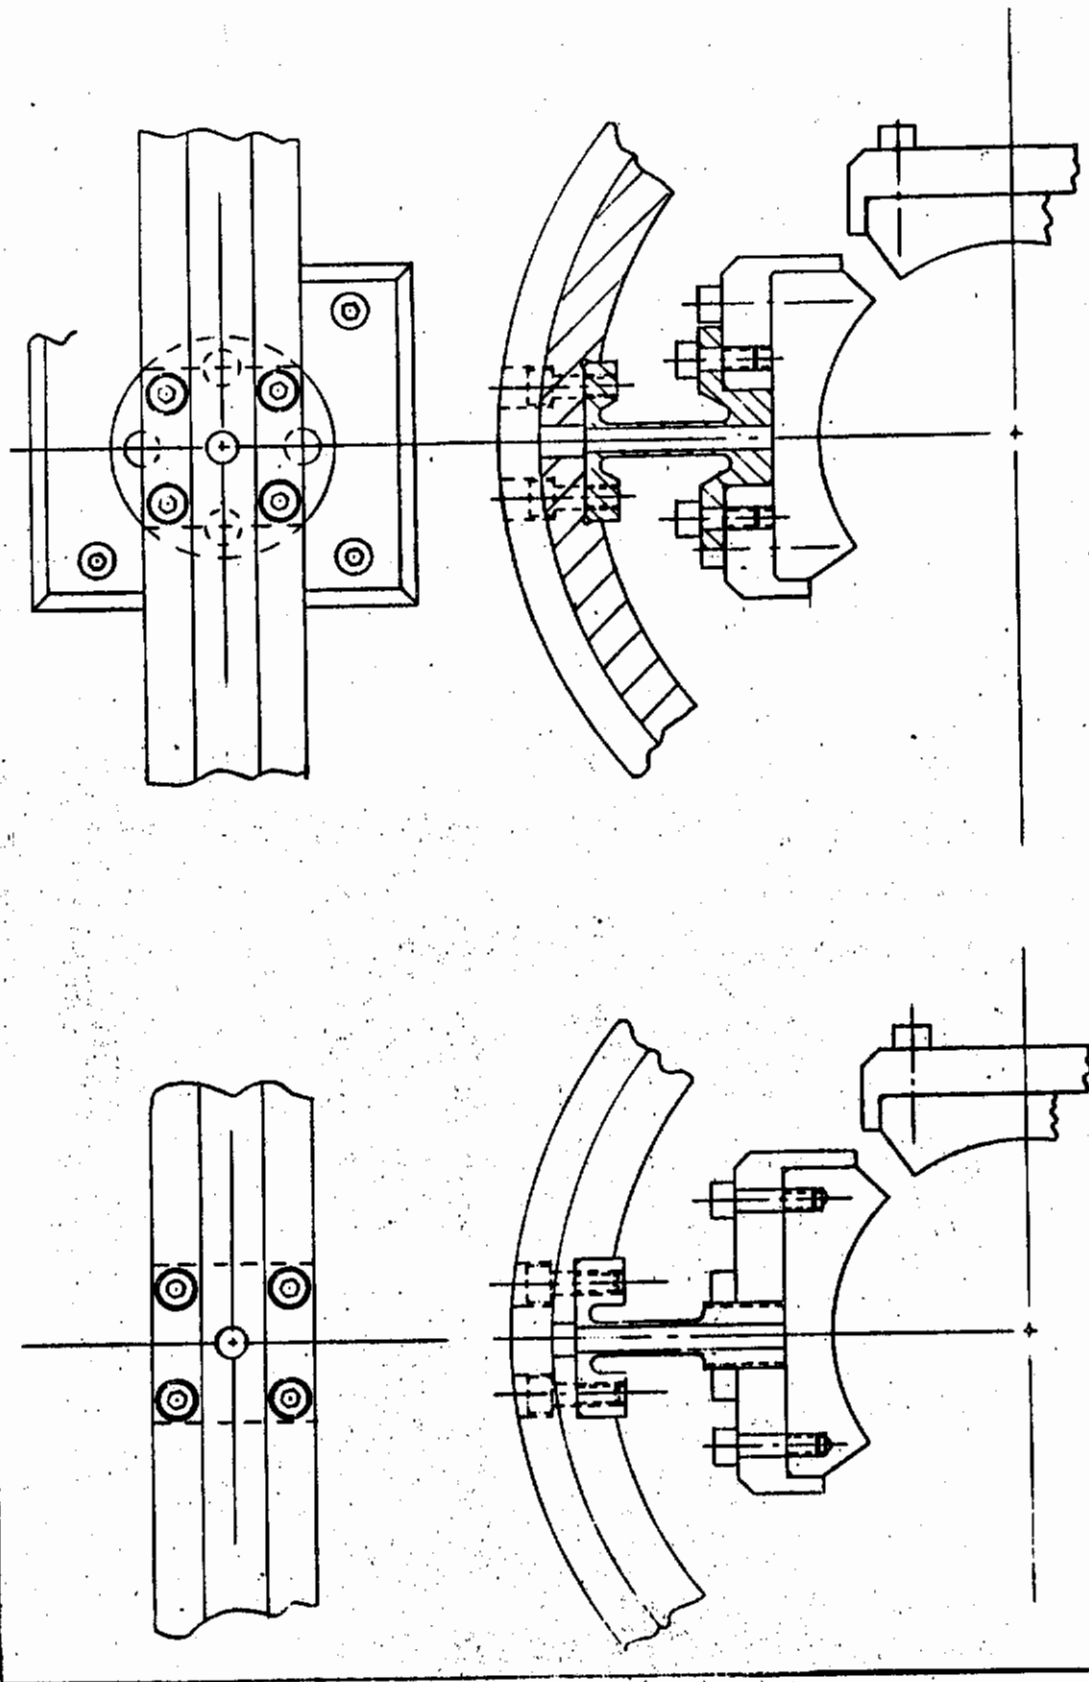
Flexibly Mounted Hybrid Pad - Preliminary Design
